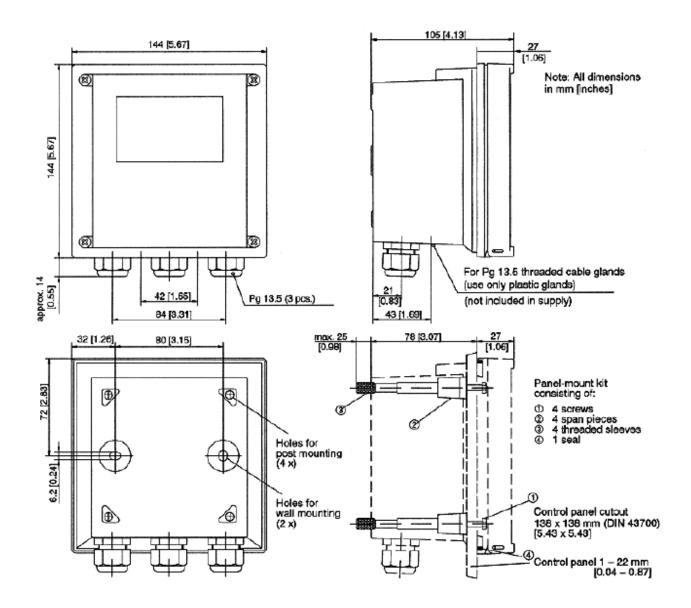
Dimension Drawing for APT4000 and P/N 51205990-001 Panel Mounting Kit
